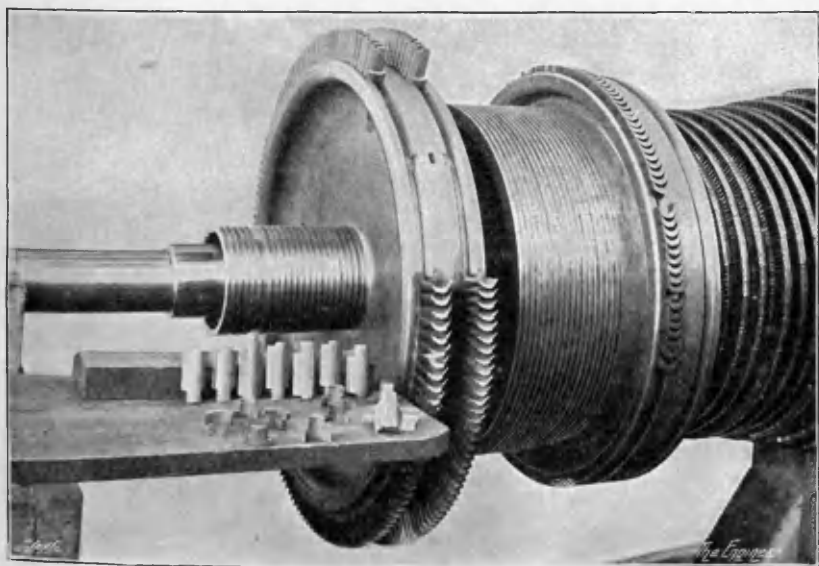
Method of Fixing Franco-Tosi Blading.
